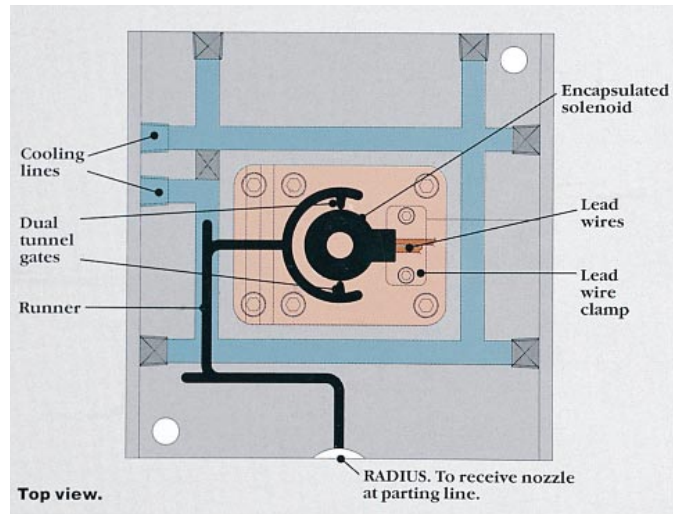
Modular mould for encapsulating a solenoid coil in a vertical-clamp press (top view).
